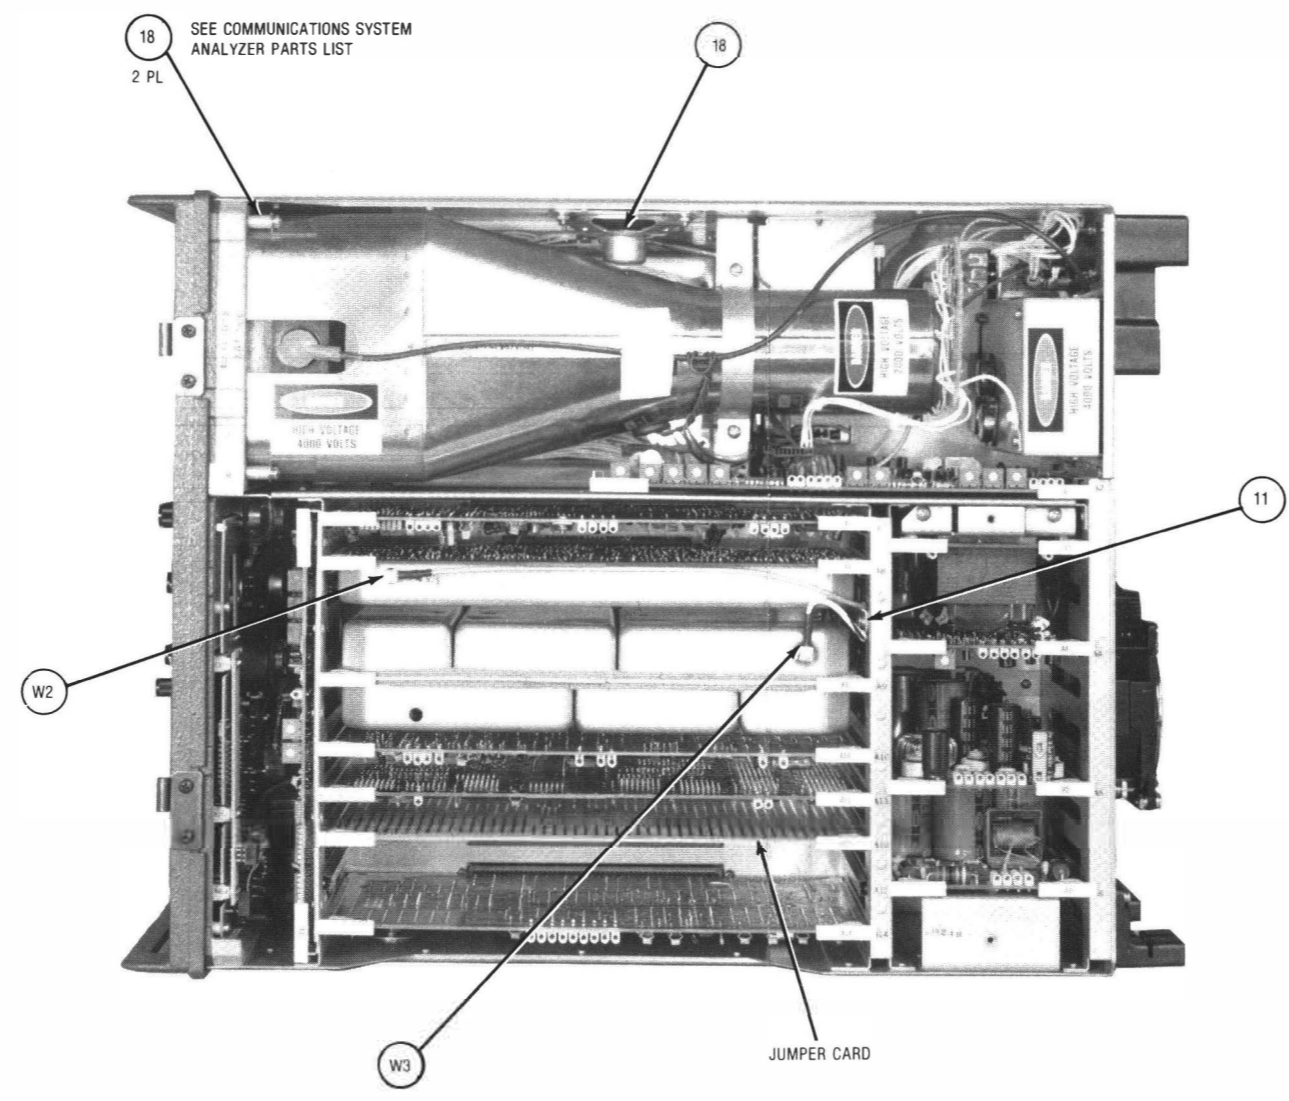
Front Panel Chassis Assembly - Top View, Cover Removed
